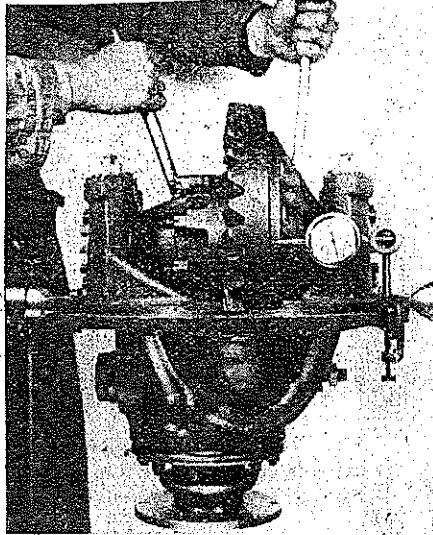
Using dial indicator to establish zero end play in differential bearings
